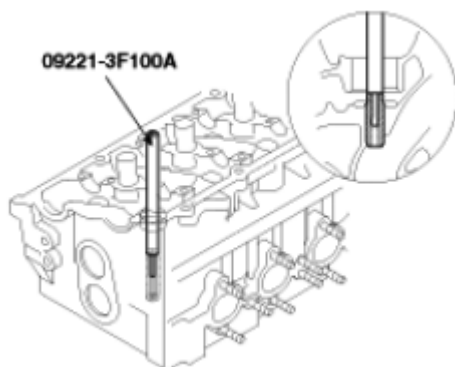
Removing Old Valve Guide Using SST (09221 - 3F100A)
